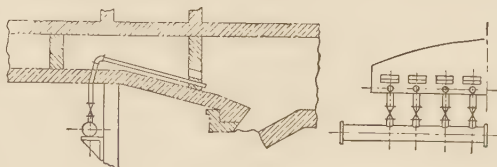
Combustion chamber of continuous furnace using coke-oven gas.
